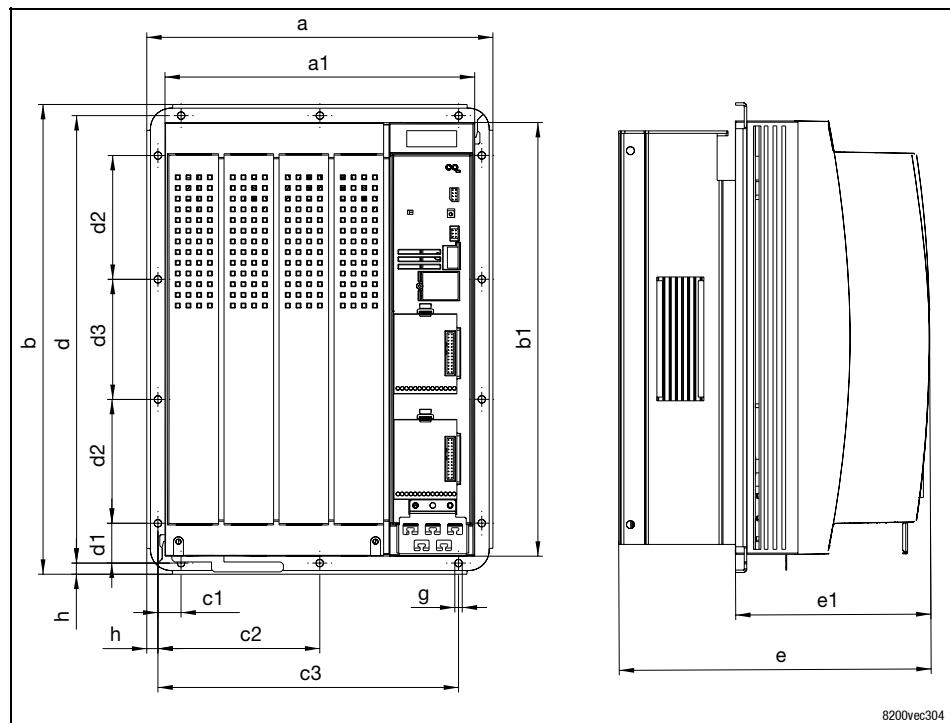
Dimensions for thermally separated mounting 15 ... 30 kW
